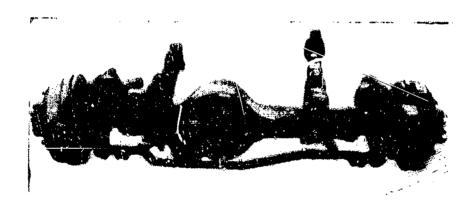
Overall view of ZIL-131 motor vehicle front axle
